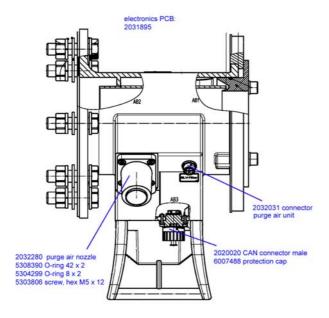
Spare parts assignment for GM35 purge air fixtures
